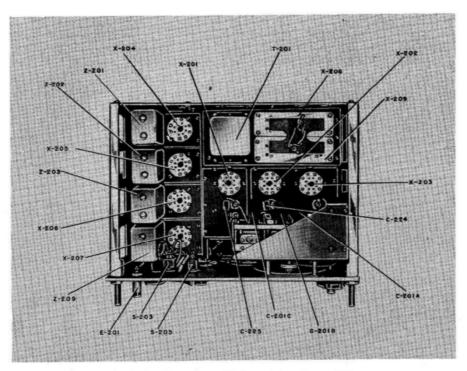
Receiver Unit — Top Open View (older model shown; see note for Fig. 1)
